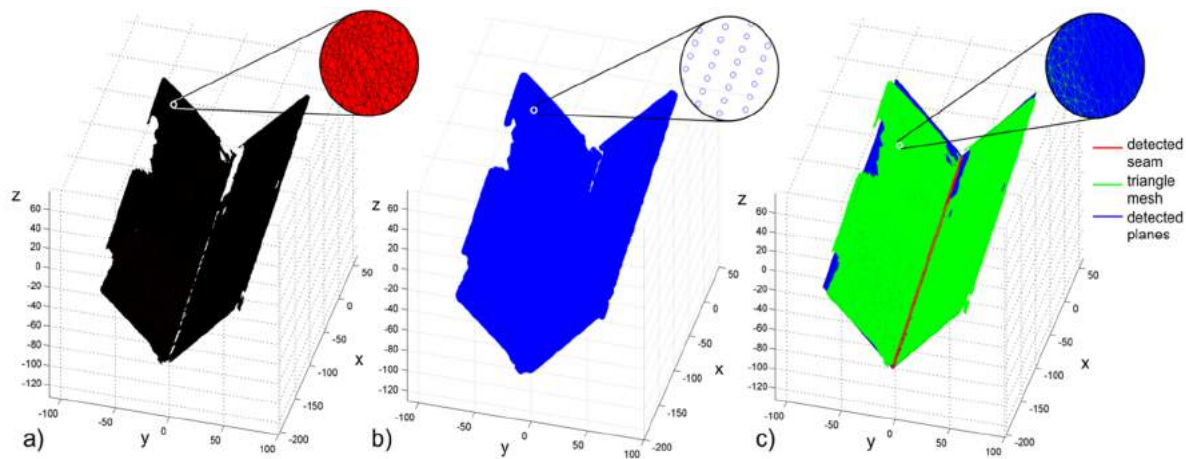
Real world example – welding seam detection from scanned point cloud
